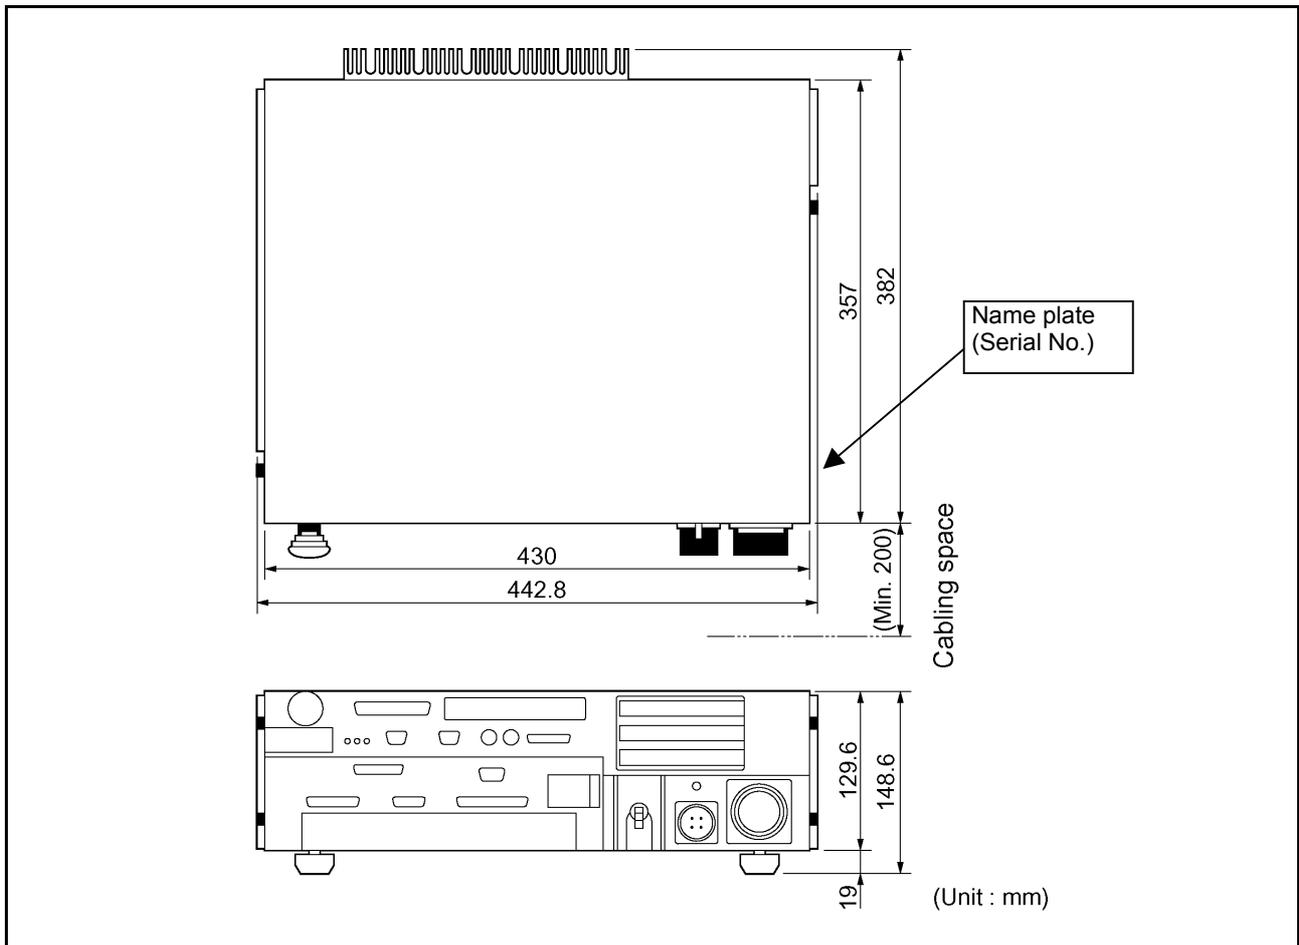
Outer Dimensions of XYC-4D Series Robot Controller
